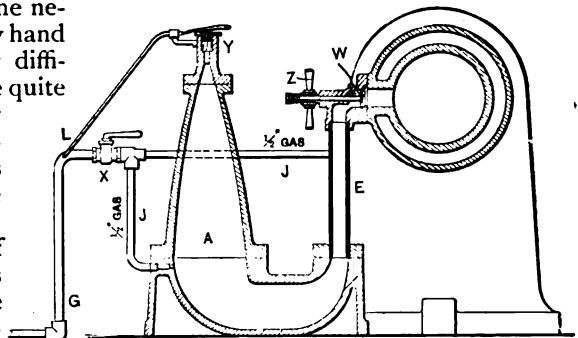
THE CLERK-LANCHESTER STARTING GEAR.
